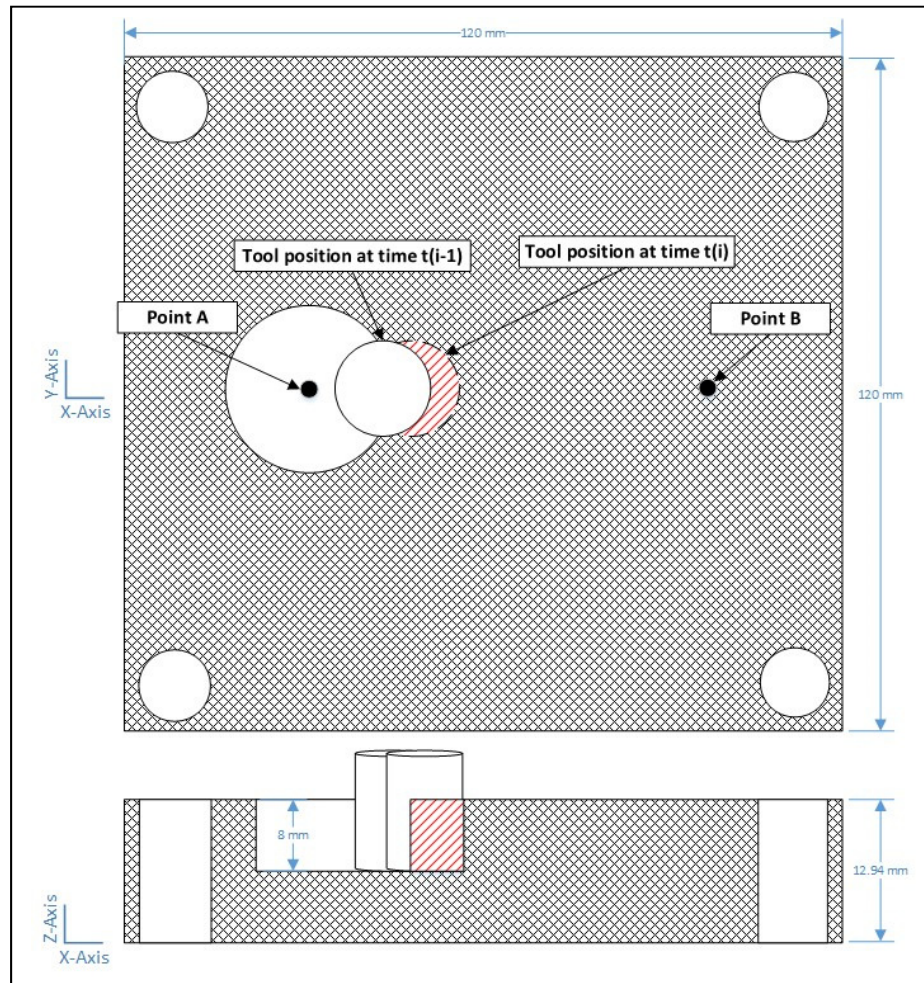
Schematic top and side views of tool-workpiece engagement
